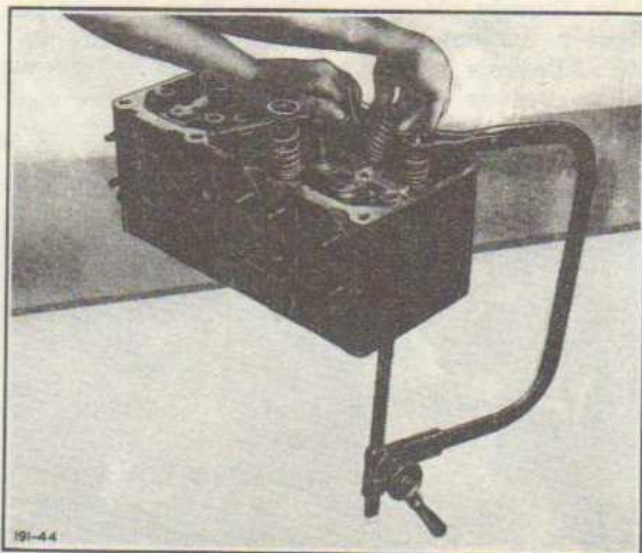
Showing an Adaptable Type of Valve Spring Compressor
